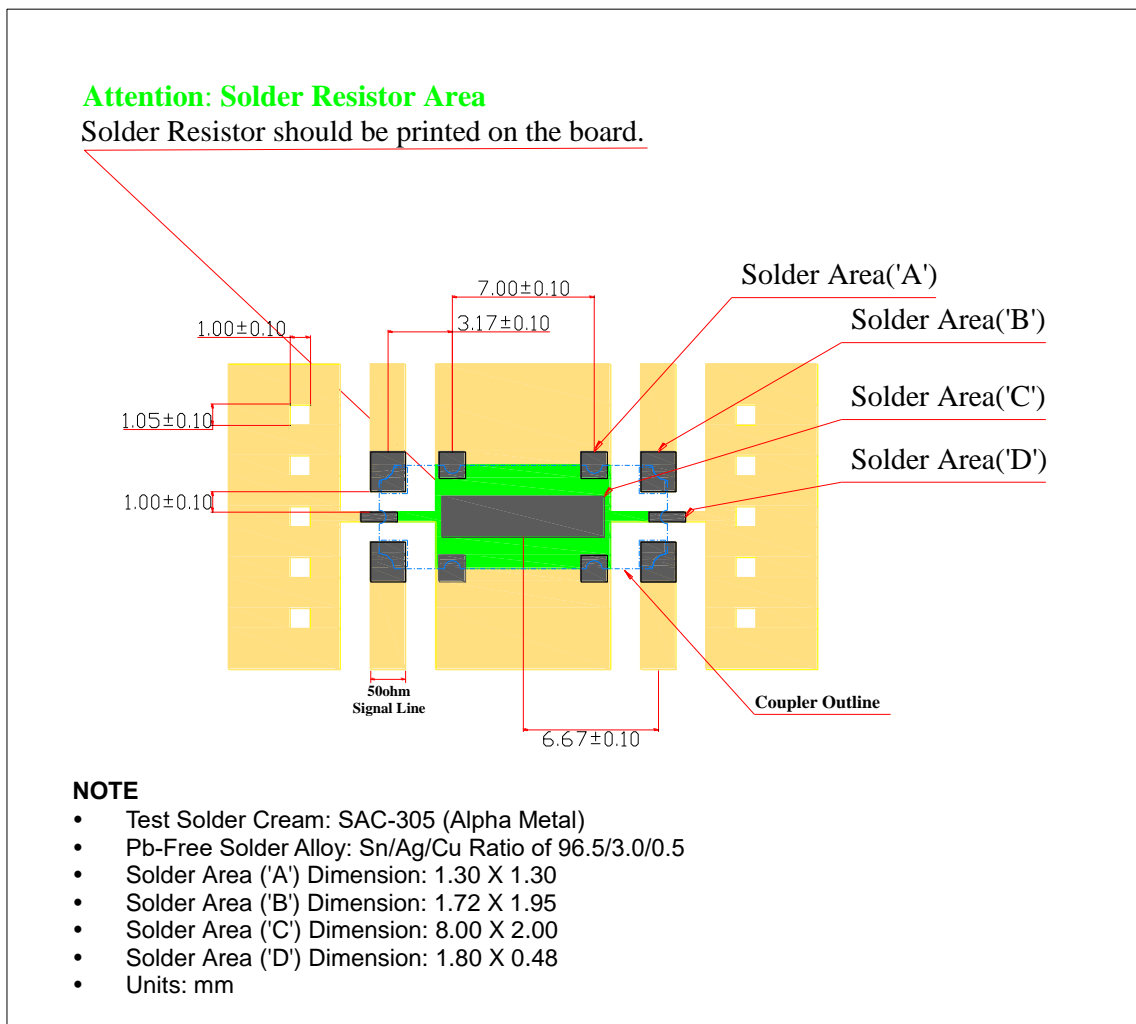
Recommended PCB Layout and Solder Mask Pattern
